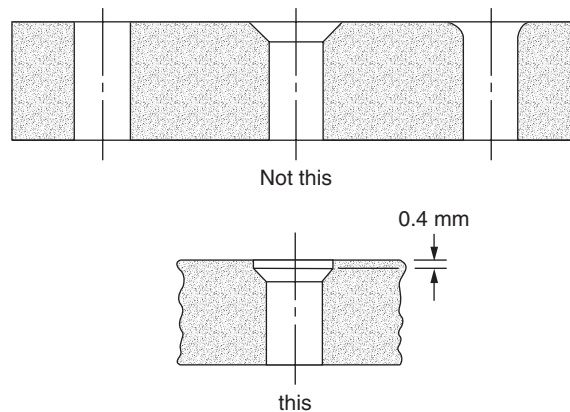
(a) Good design calls for a spot location of a hole that is to be drilled, (b) A spot should never be located perpendicular to the draw as this will constitute an undercut.
